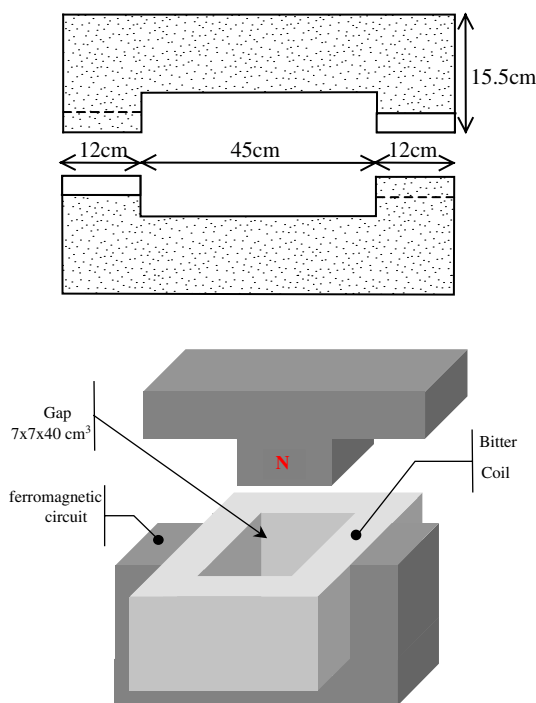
Sketch of the designed electromagnet. (a) Two C-shaped copper plates before being welded together at one of their ends. (b) The Bitter coil and the ferromagnetic circuit, in open configuration.
